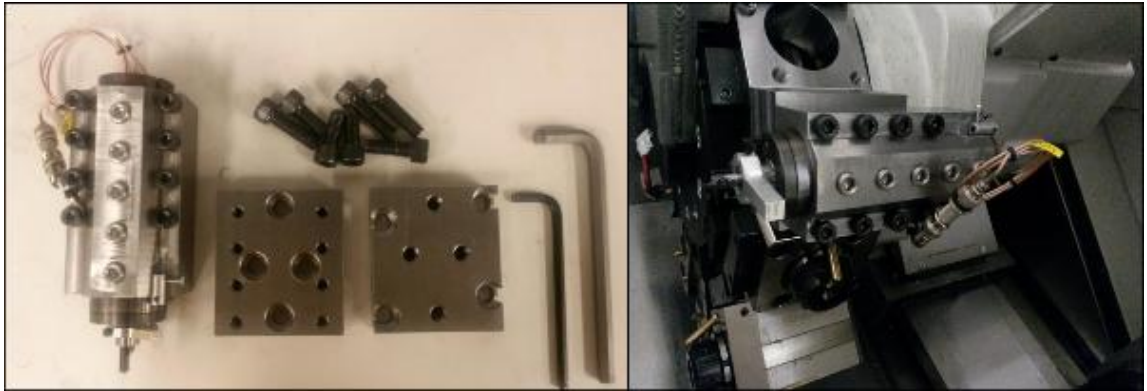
MAT mounting system both disassembled (left), and assembled on the lathe (right)
